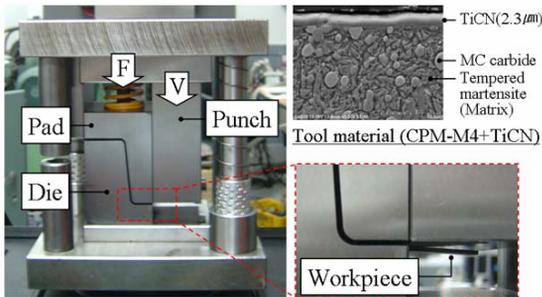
Trimming apparatus and microstructure of cutting tool steel
